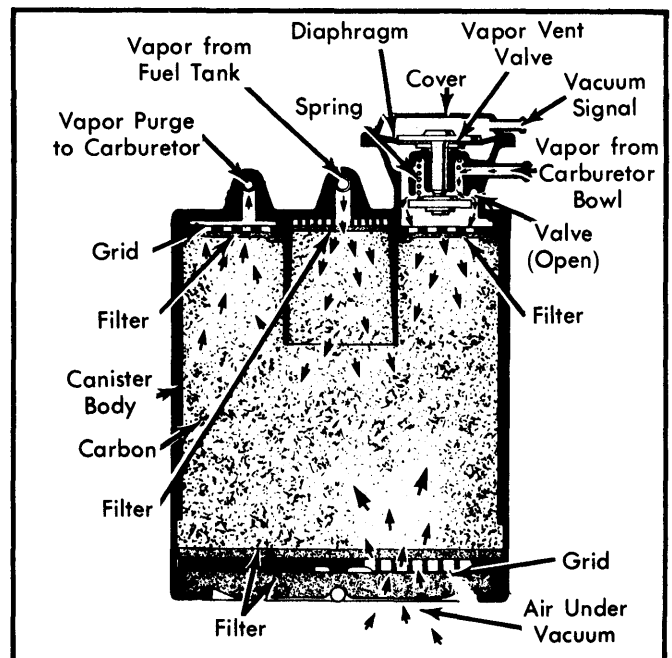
Cutaway View of Carbon Canister with Vapor Vent Valve
